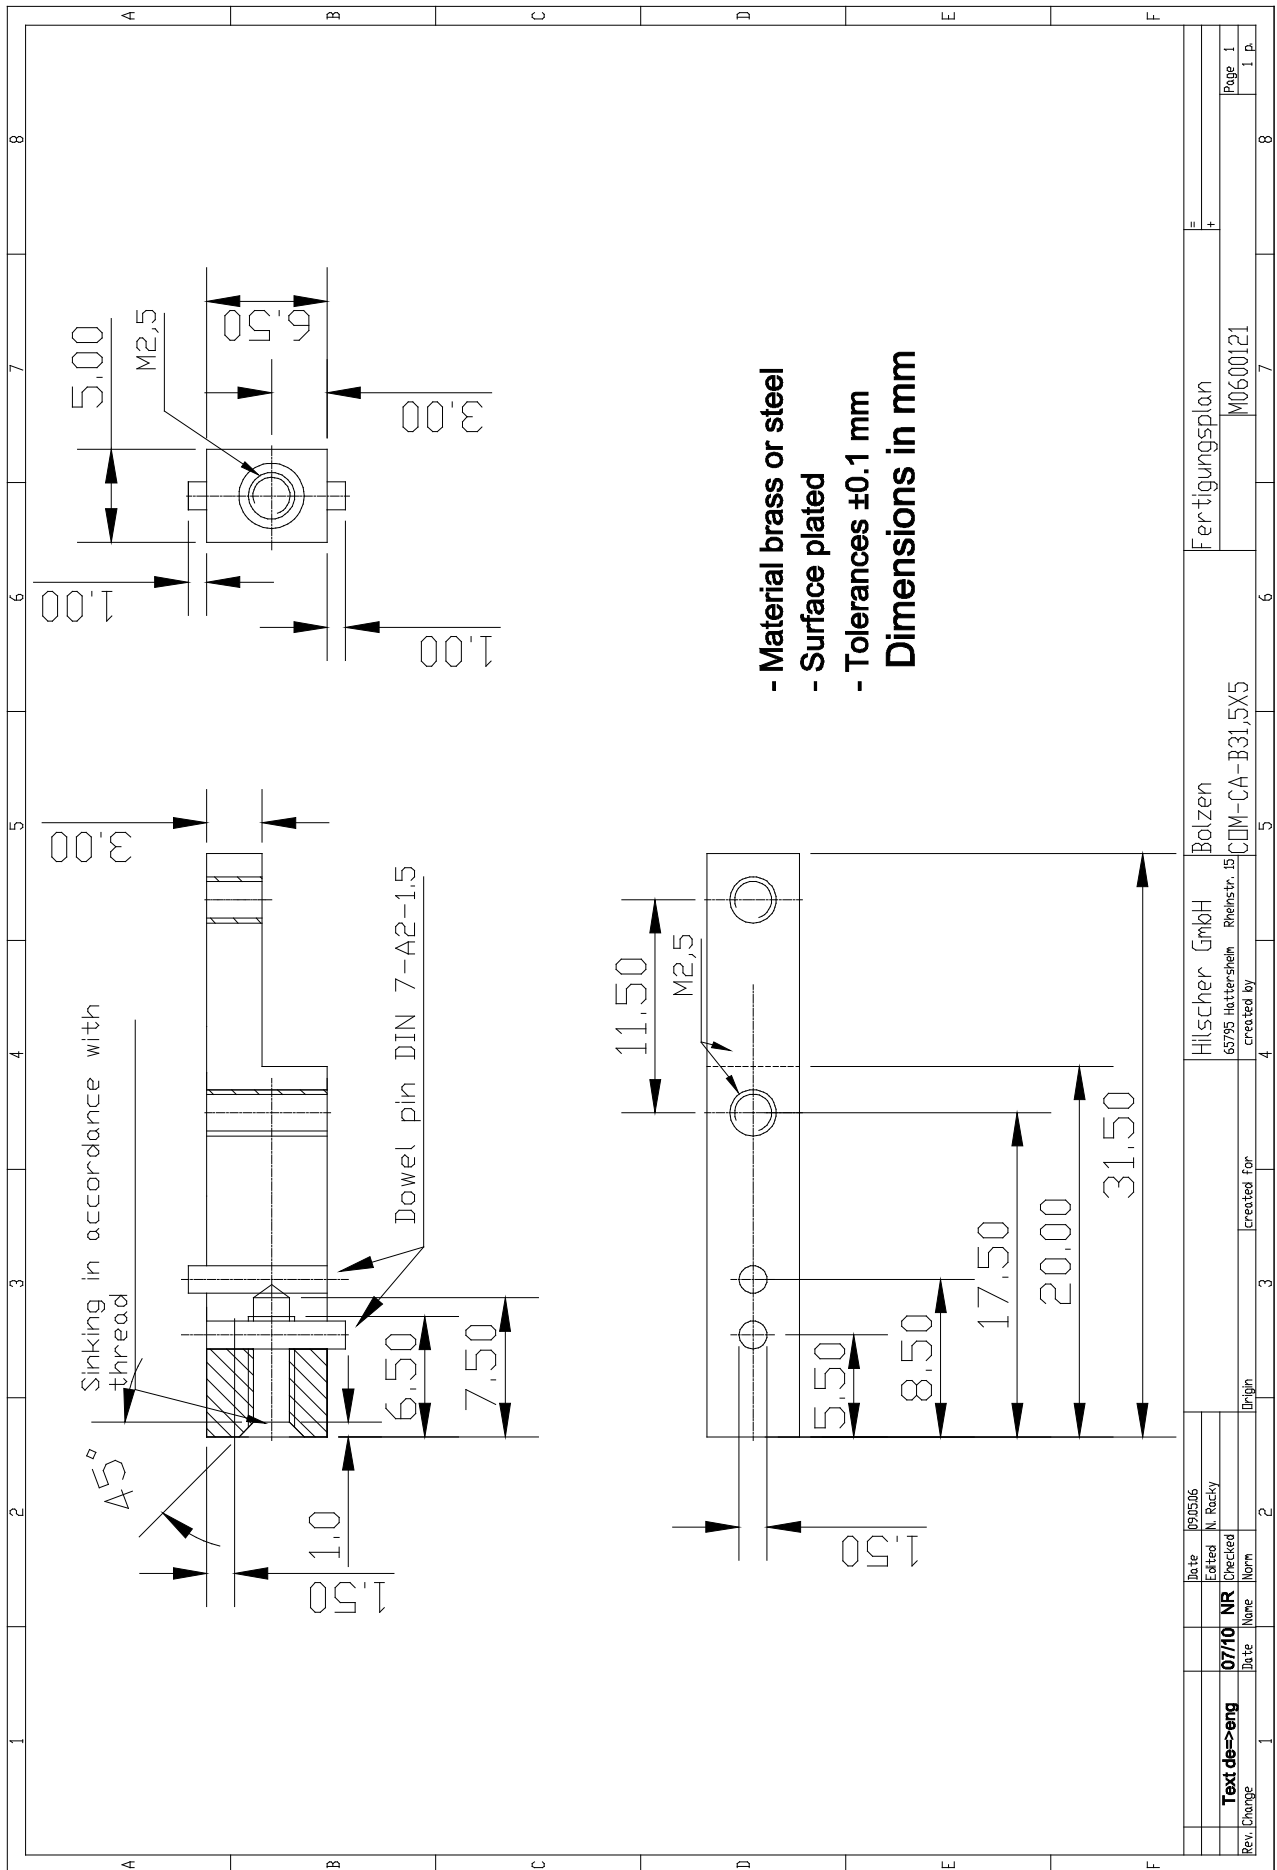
Mechanical dimension of Bolt COM-CA-B31,5X5
